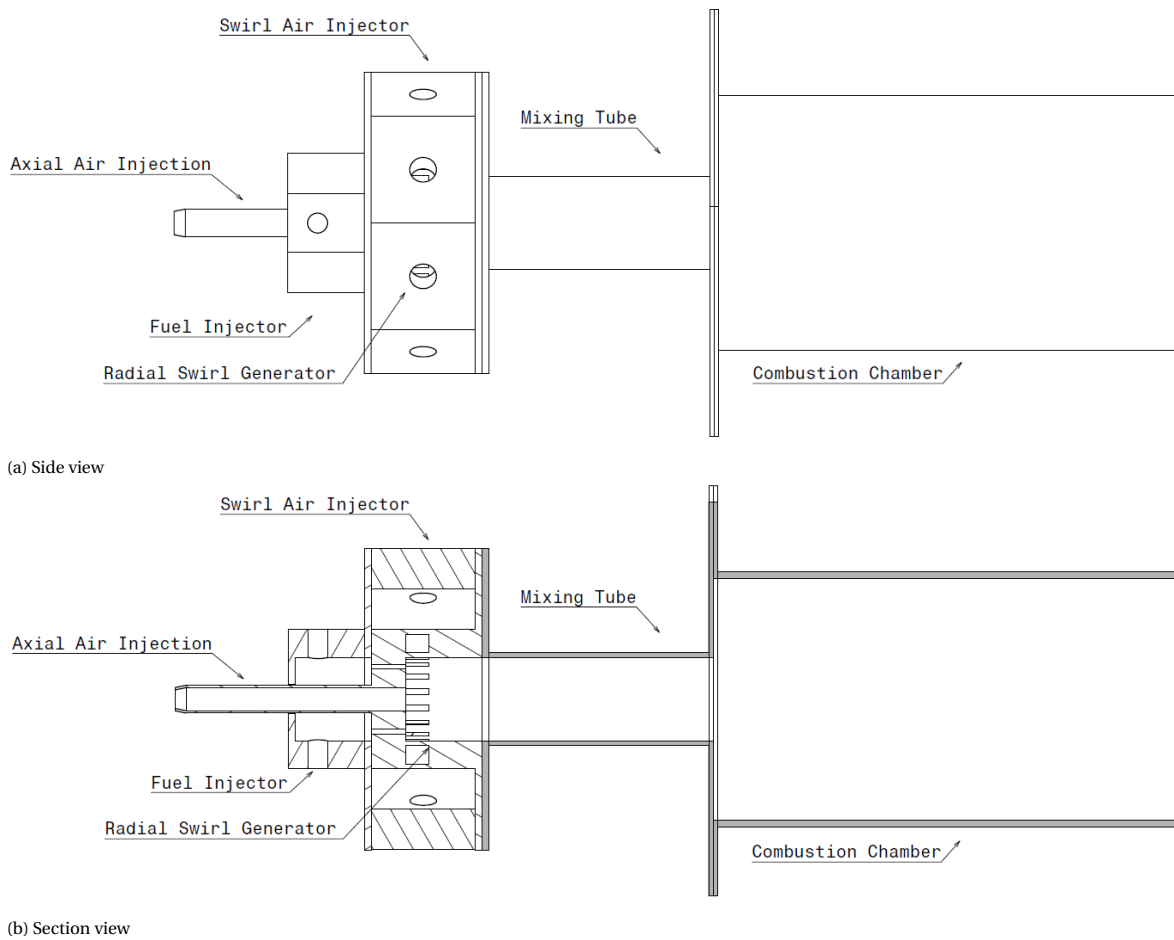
Technical drawings of the radial swirler combustor model with axial air injection
